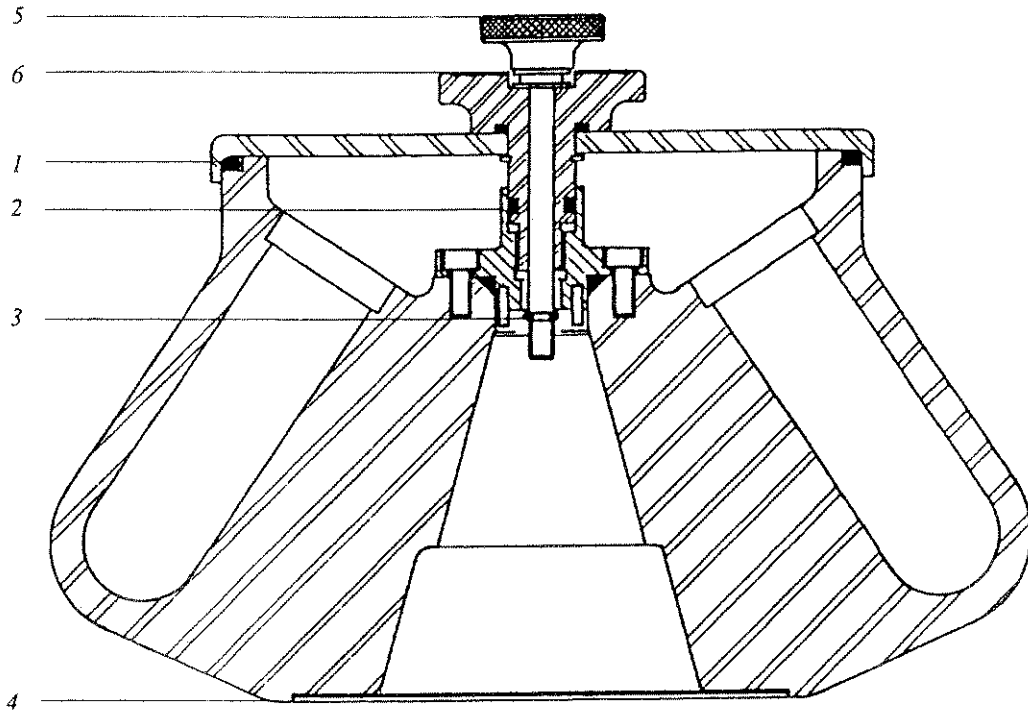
ANGLE ROTOR CONSTRUCTION - USER REPLACEABLE PARTS
